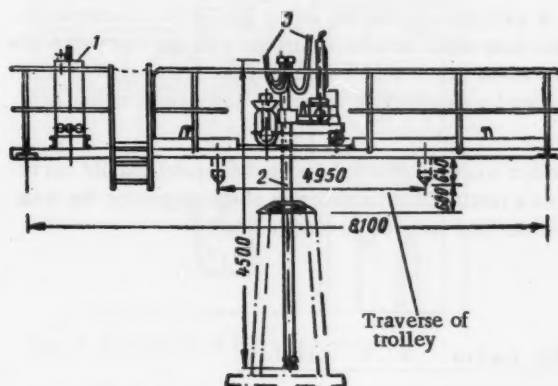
Machine for lubricating molds. 1) Tank for resin; 2) pipe; 3) hoses.
